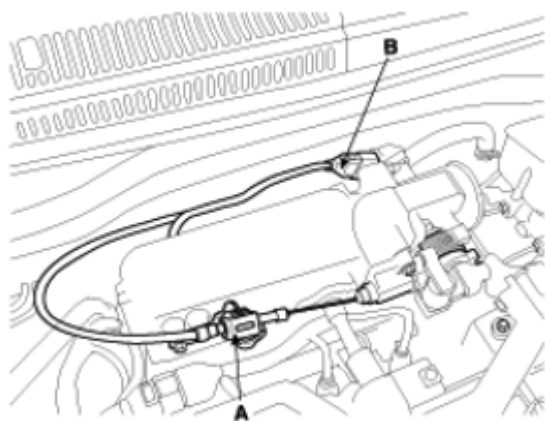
Identifying Accelerator Cable And TPS (Throttle Position Sensor) Connector
